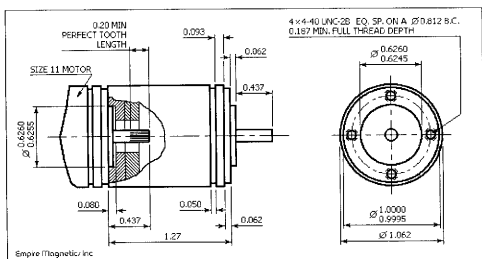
Empire Magnetics planetary gearbox, model no. 11P:25¹⁶.
